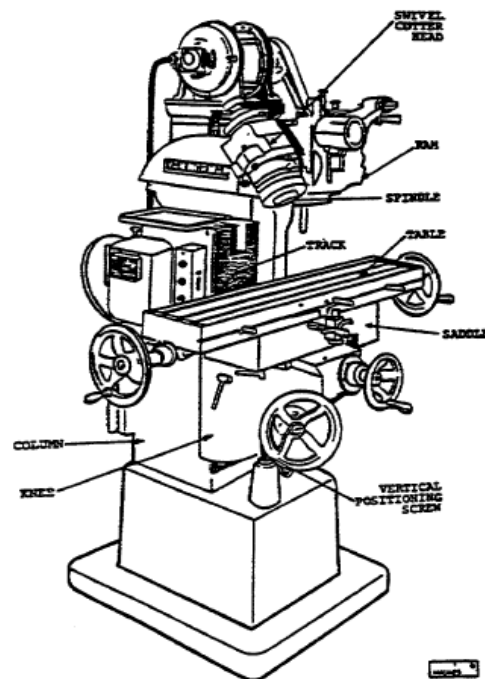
Swivel cutter head Ram-type Milling machine [12].
